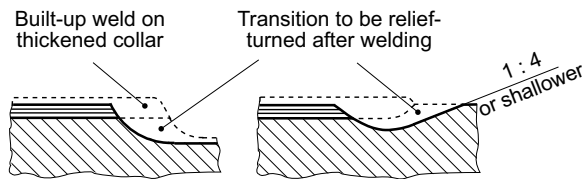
Build-up welds applied to rudderstocks and pintles
